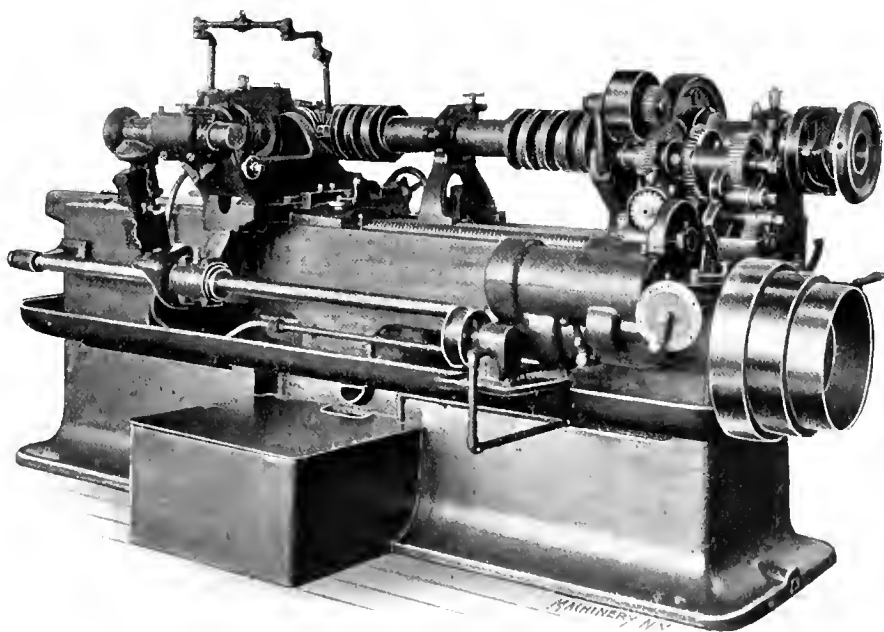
The Pratt & Whitney Thread Milling Machine, engaged in Cutting a Worm
